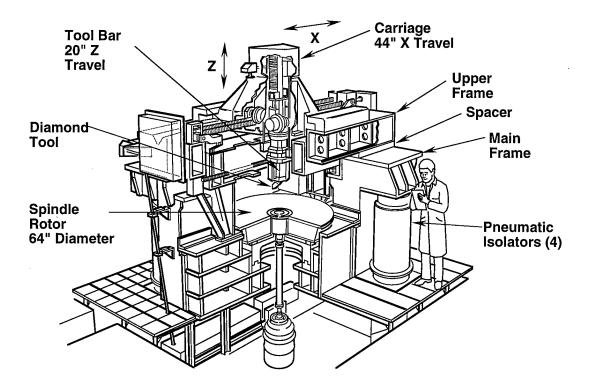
Large Optics Diamond Turning Machine (LODTM)
